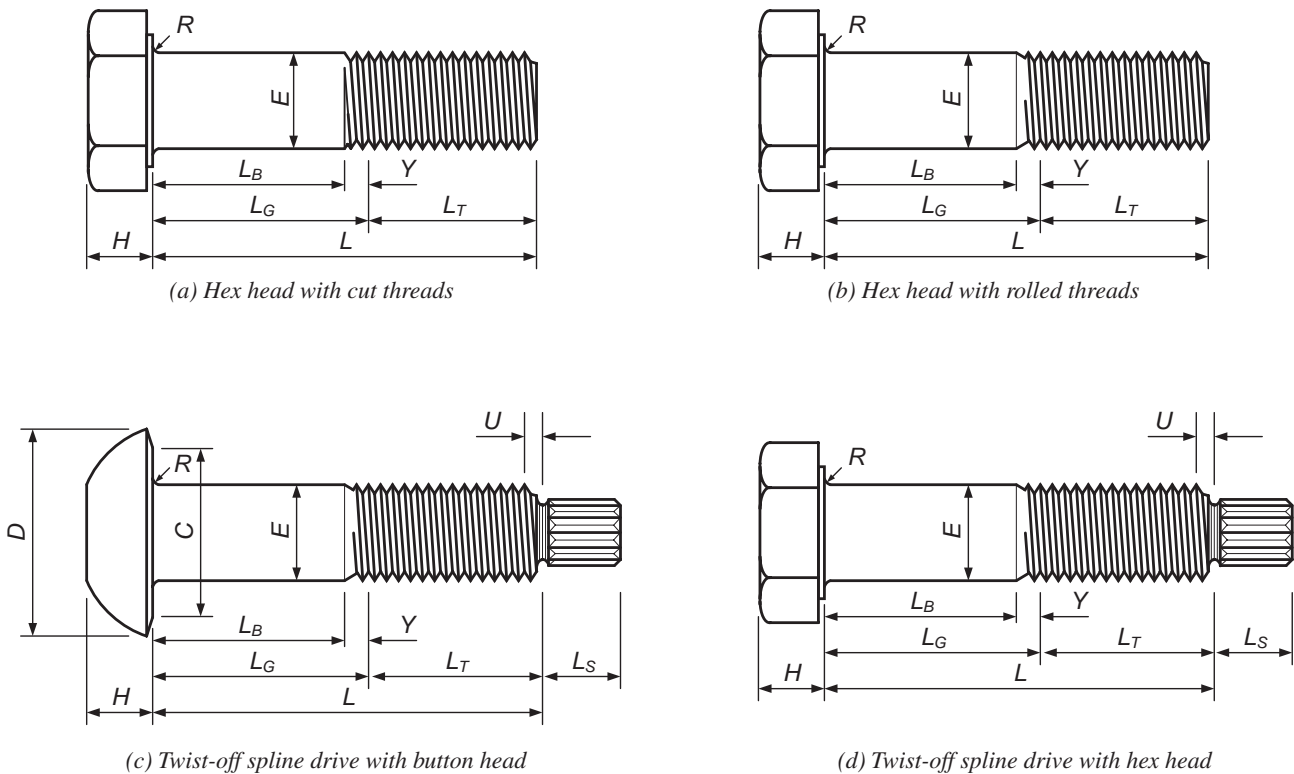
Geometry of ASTM F3125 bolts (ASME B18.2.6-19).
